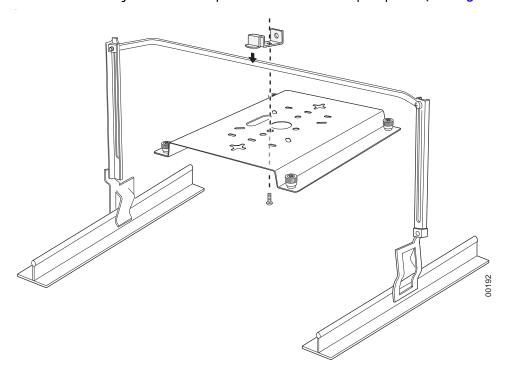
Attaching the Mounting Bracket to the Box Hanger
